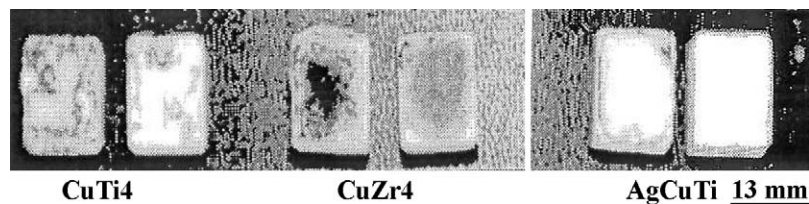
Photographs showing fracture surfaces using different active filler alloys.
